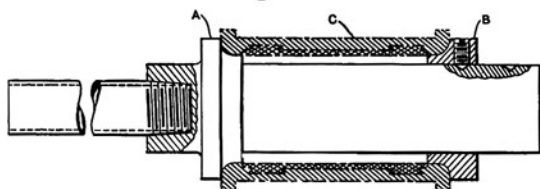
Adjustable Mandrel for Babbitting Plain Half Bearings
